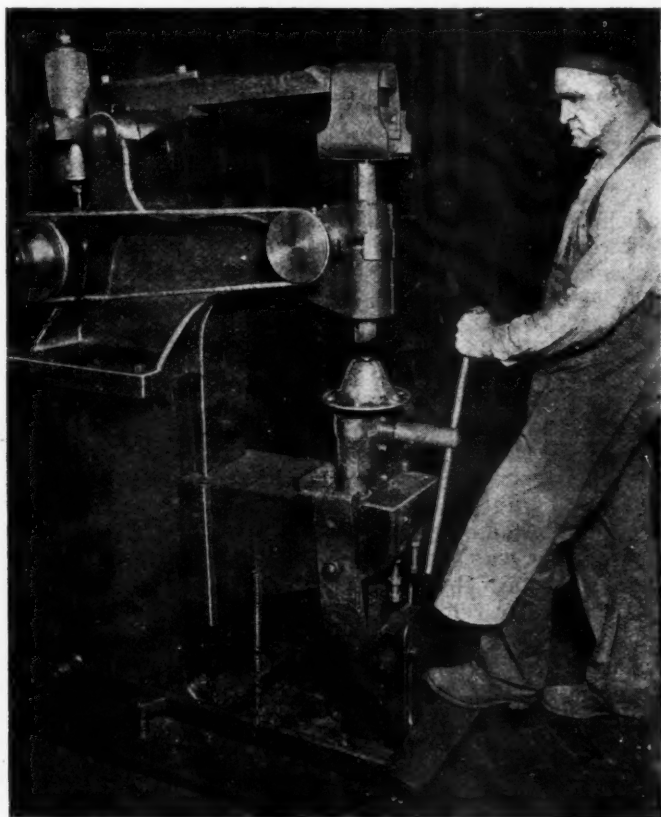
Securing driving flanges to rear axle shafts of three-quarter floating axle
